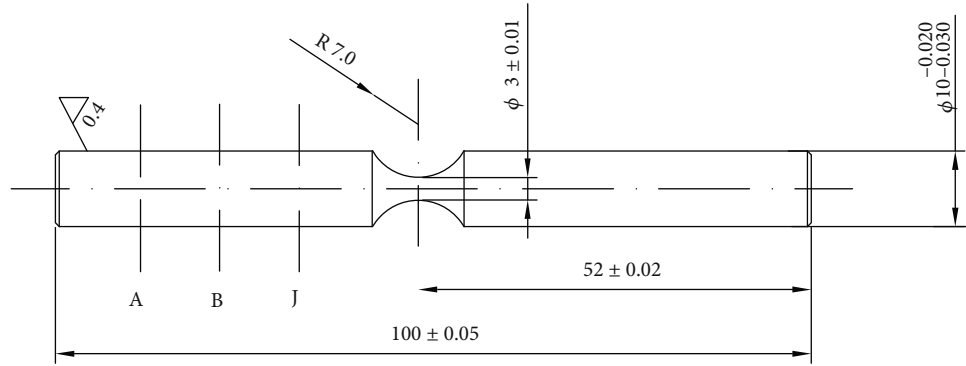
Specimen shape and dimensions for rotating bending fatigue testing.
